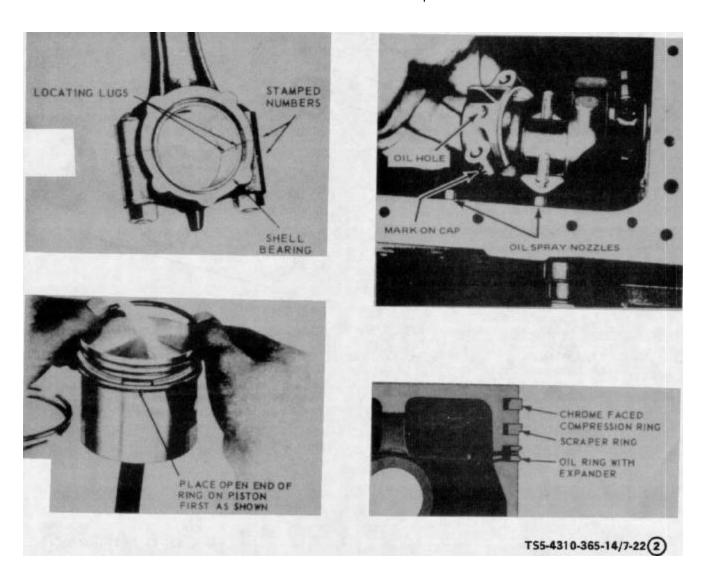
Connecting rods, bearings, pistons, and rings (sheet 2 of 2)
